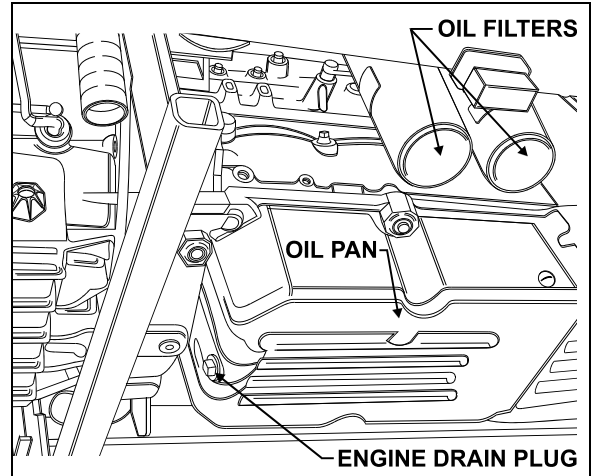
ENGINE DRAIN PLUG AND OIL FILTERS 01029
